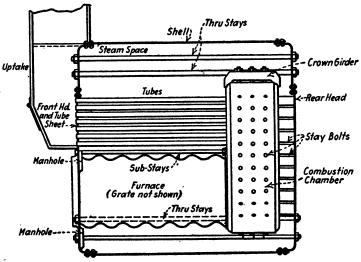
Longitudinal Cross-section of Two Furnace Boiler
